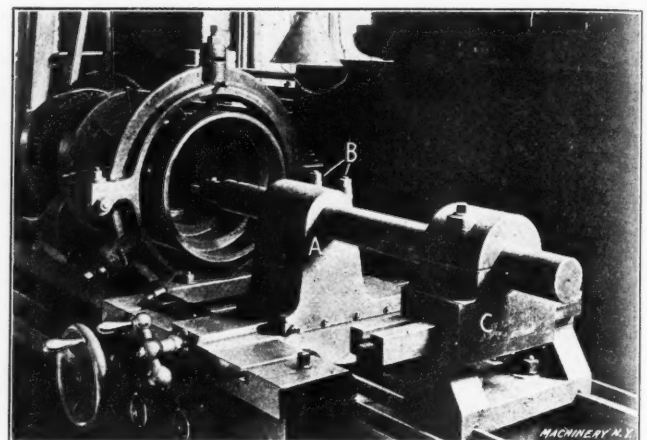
Equipment for Boring the Inside of Cone Pulleys
